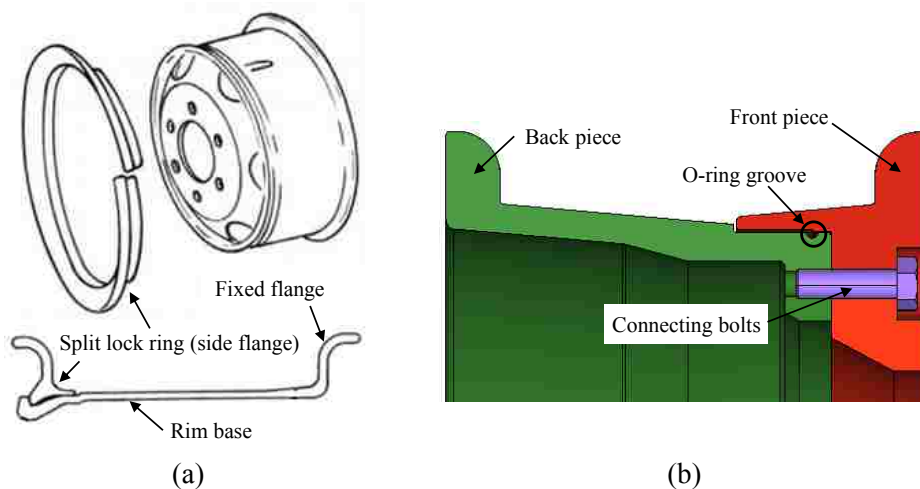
A two-piece wheel with a split lock ring (a) [19, 20] and a two-piece wheel with connecting bolts.
